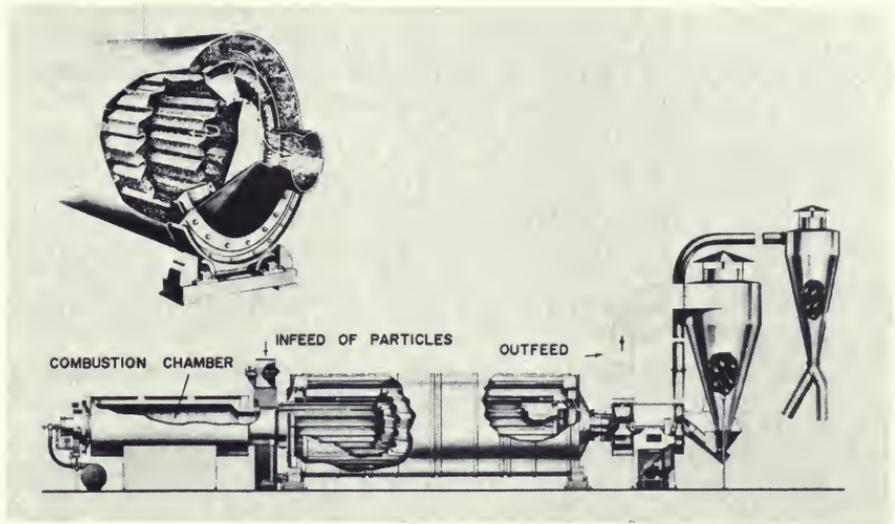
Rotating three-pass drum dryer. (Bottom) Major components. Infeed of furnish and hot air to inner drum on left; discharge from outer drum to hot cyclone (to separate hot gases from the dry particles) and final cyclone on right. (Top) Flow-path of furnish from hot inner drum to intermediate drum to cooler outer drum. Baffles cause particles to tumble as they pass through the three drums. Outfeed end shown. (Drawings after Stillinger 1967.)
